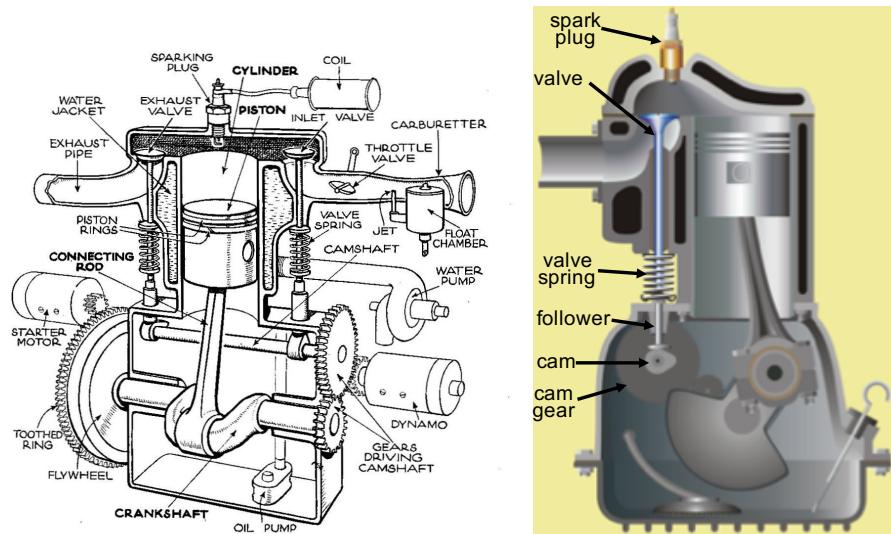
(left) Section view of a small IC engine similar to the one used in the present experiment. (right) Close-up view of the valve actuation mechanism.
